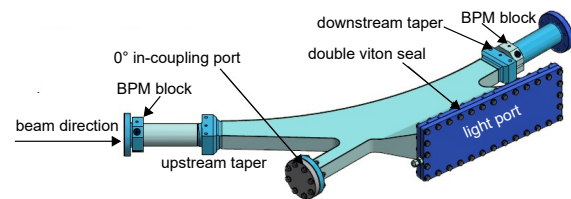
Design of the dipole magnet chamber with light port. The dimensions ($l \times w \times h$) are approx. 1200 mm \times 700 mm \times 170 mm. Additionally, two sets of BPM and taper are located at the entrance and exit of the dipole chamber. The taper generates a smooth transition between the rectangular profile of the dipole chamber body and the round profile of the connecting vacuum tubes.
